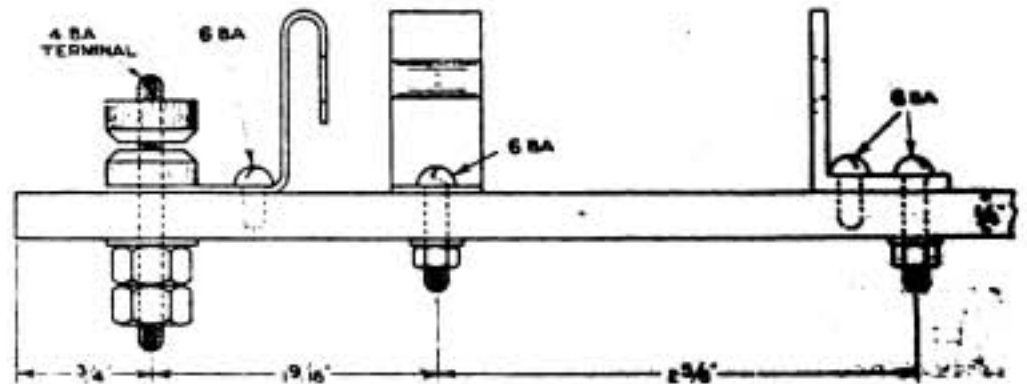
Showing how to arrange the V24 Valve Holder contacts, one of which is held under the 4 B.A. terminal with a 6 B.A. screw for fixing.
